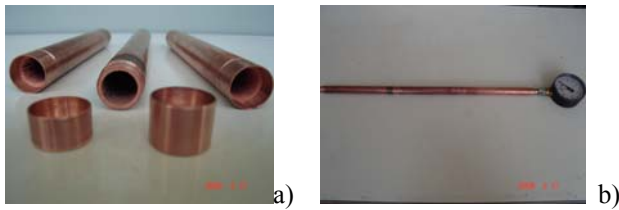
Copper pipes with a porous copper internal layer: a) pipe parts and adapting pieces, b) assembled heat pipe
